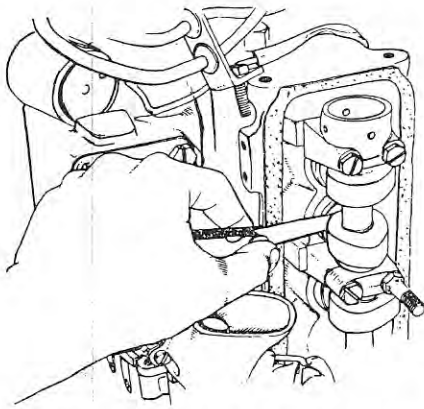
When adjusting the valve tappet clearance, turn the camshaft until lobe is pointing away from cam follower as shown.
